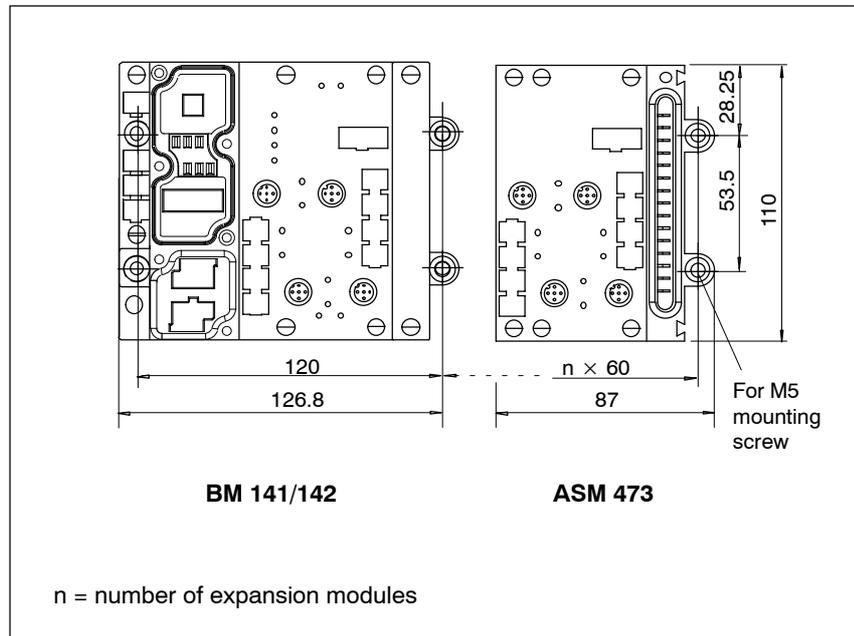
Dimensions for mounting holes for basic and expansion modules.
